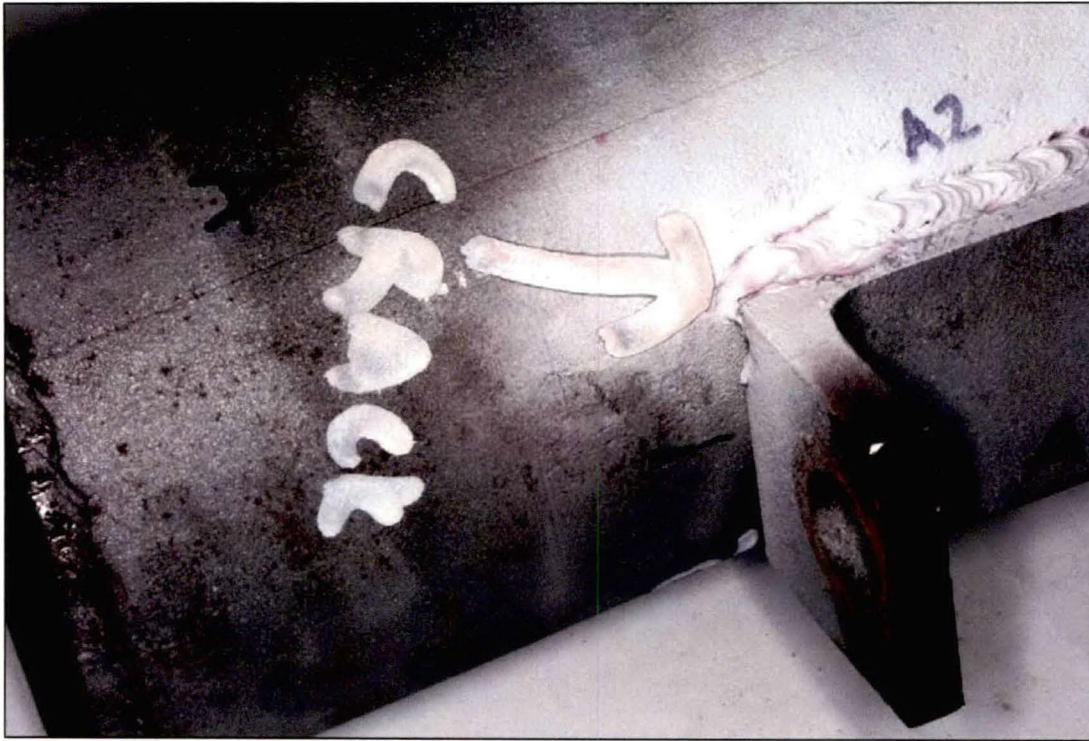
Image of the Lug A2 top weld which exhibited a crack that was detected during dye penetrant inspection.
